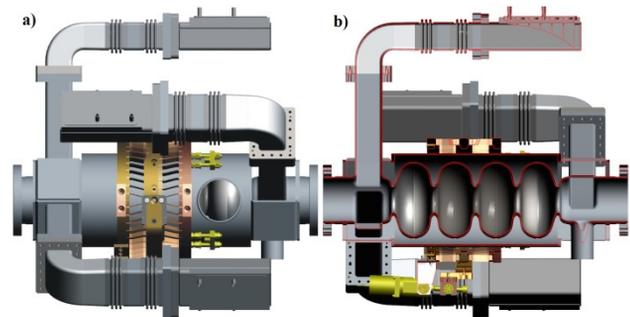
4-cell 1.5 GHz cavity design equipped with Helvessel and blade tuner (a). Cut plane view showing waveguide (WG) HOM loads design details (b).
